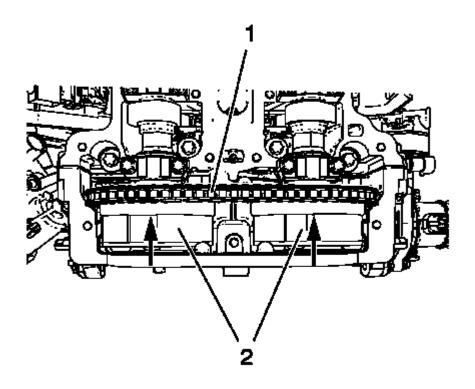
Timing Chain And Camshaft Sprockets Courtesy of GENERAL MOTORS COMPANY
